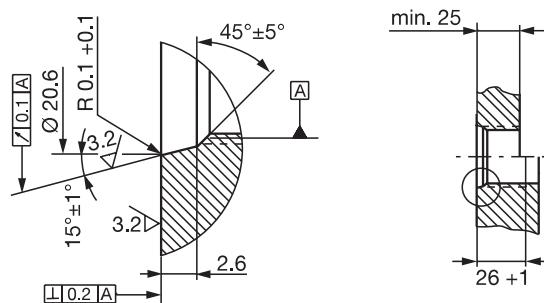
Mounting hole 3/4"-16UNF per SAE J475 O-ring 15.3×2.4
